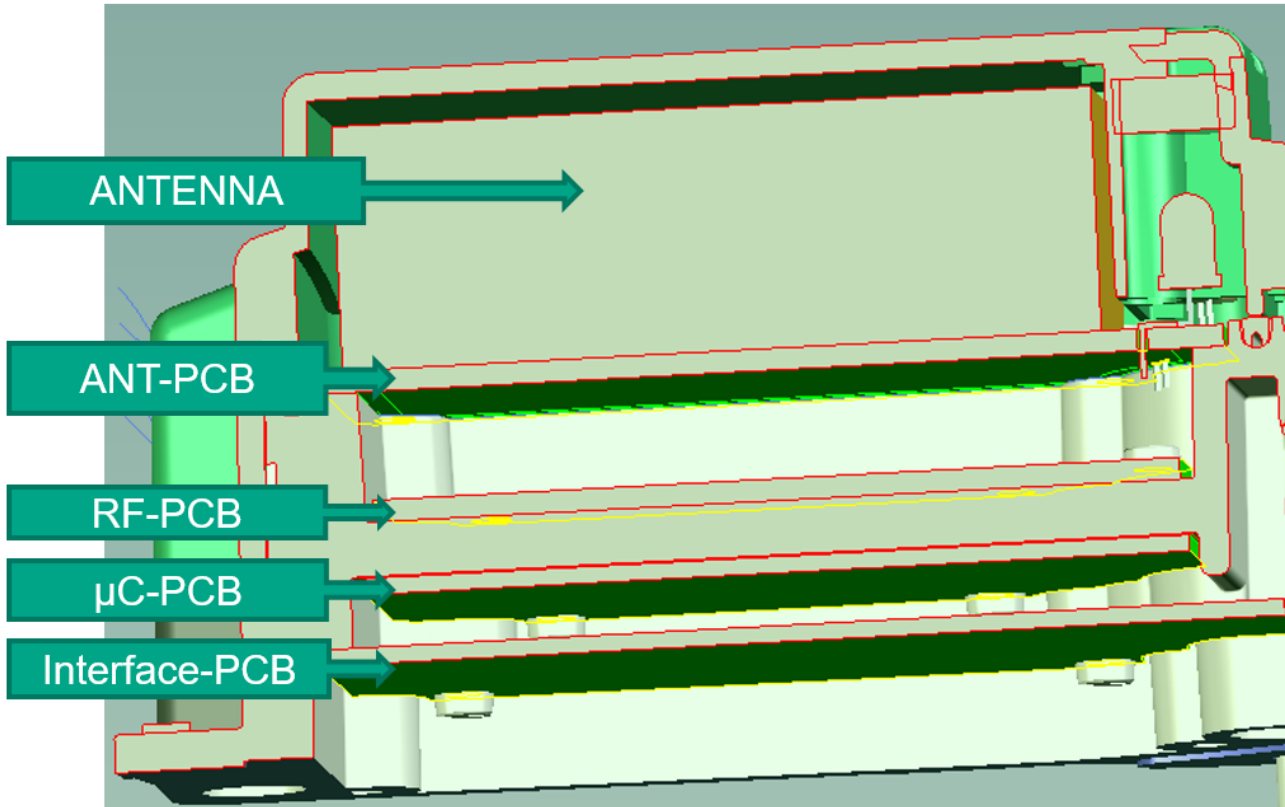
mounting of PCBs in housing (interface-PCB shown as example for host)
